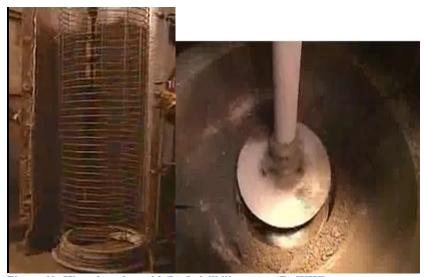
Hinged steel mould (L) & drill like screw (R) [XIX]
